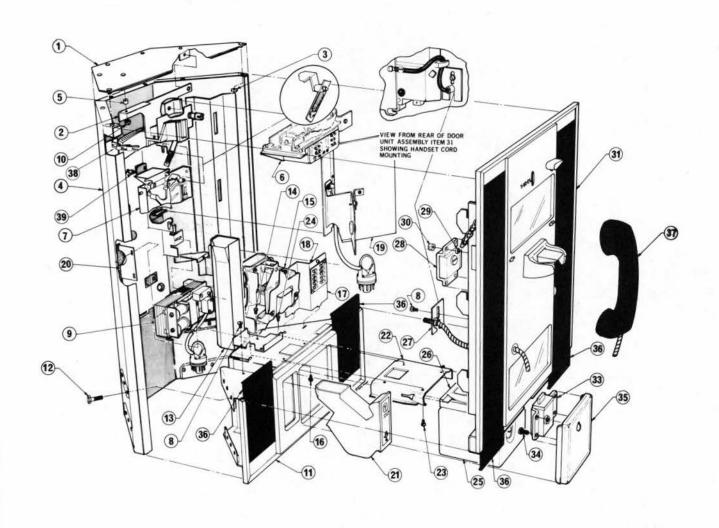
QSD300A and QSD2300A Coin Telephone Sets - See Table C for Assembly of Parts Detail
